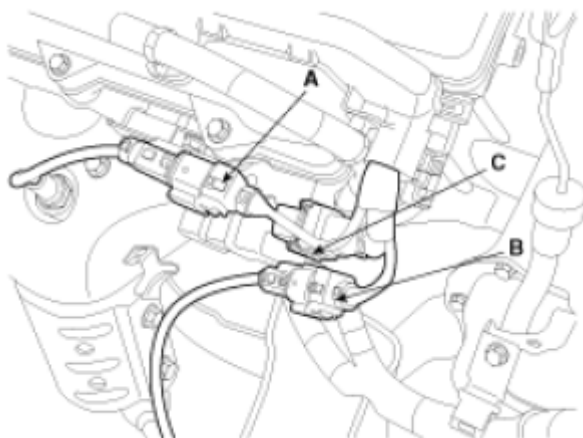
Identifying Bank 2 Front/Rear O2 Sensor Connectors And CKP Sensor Connector
